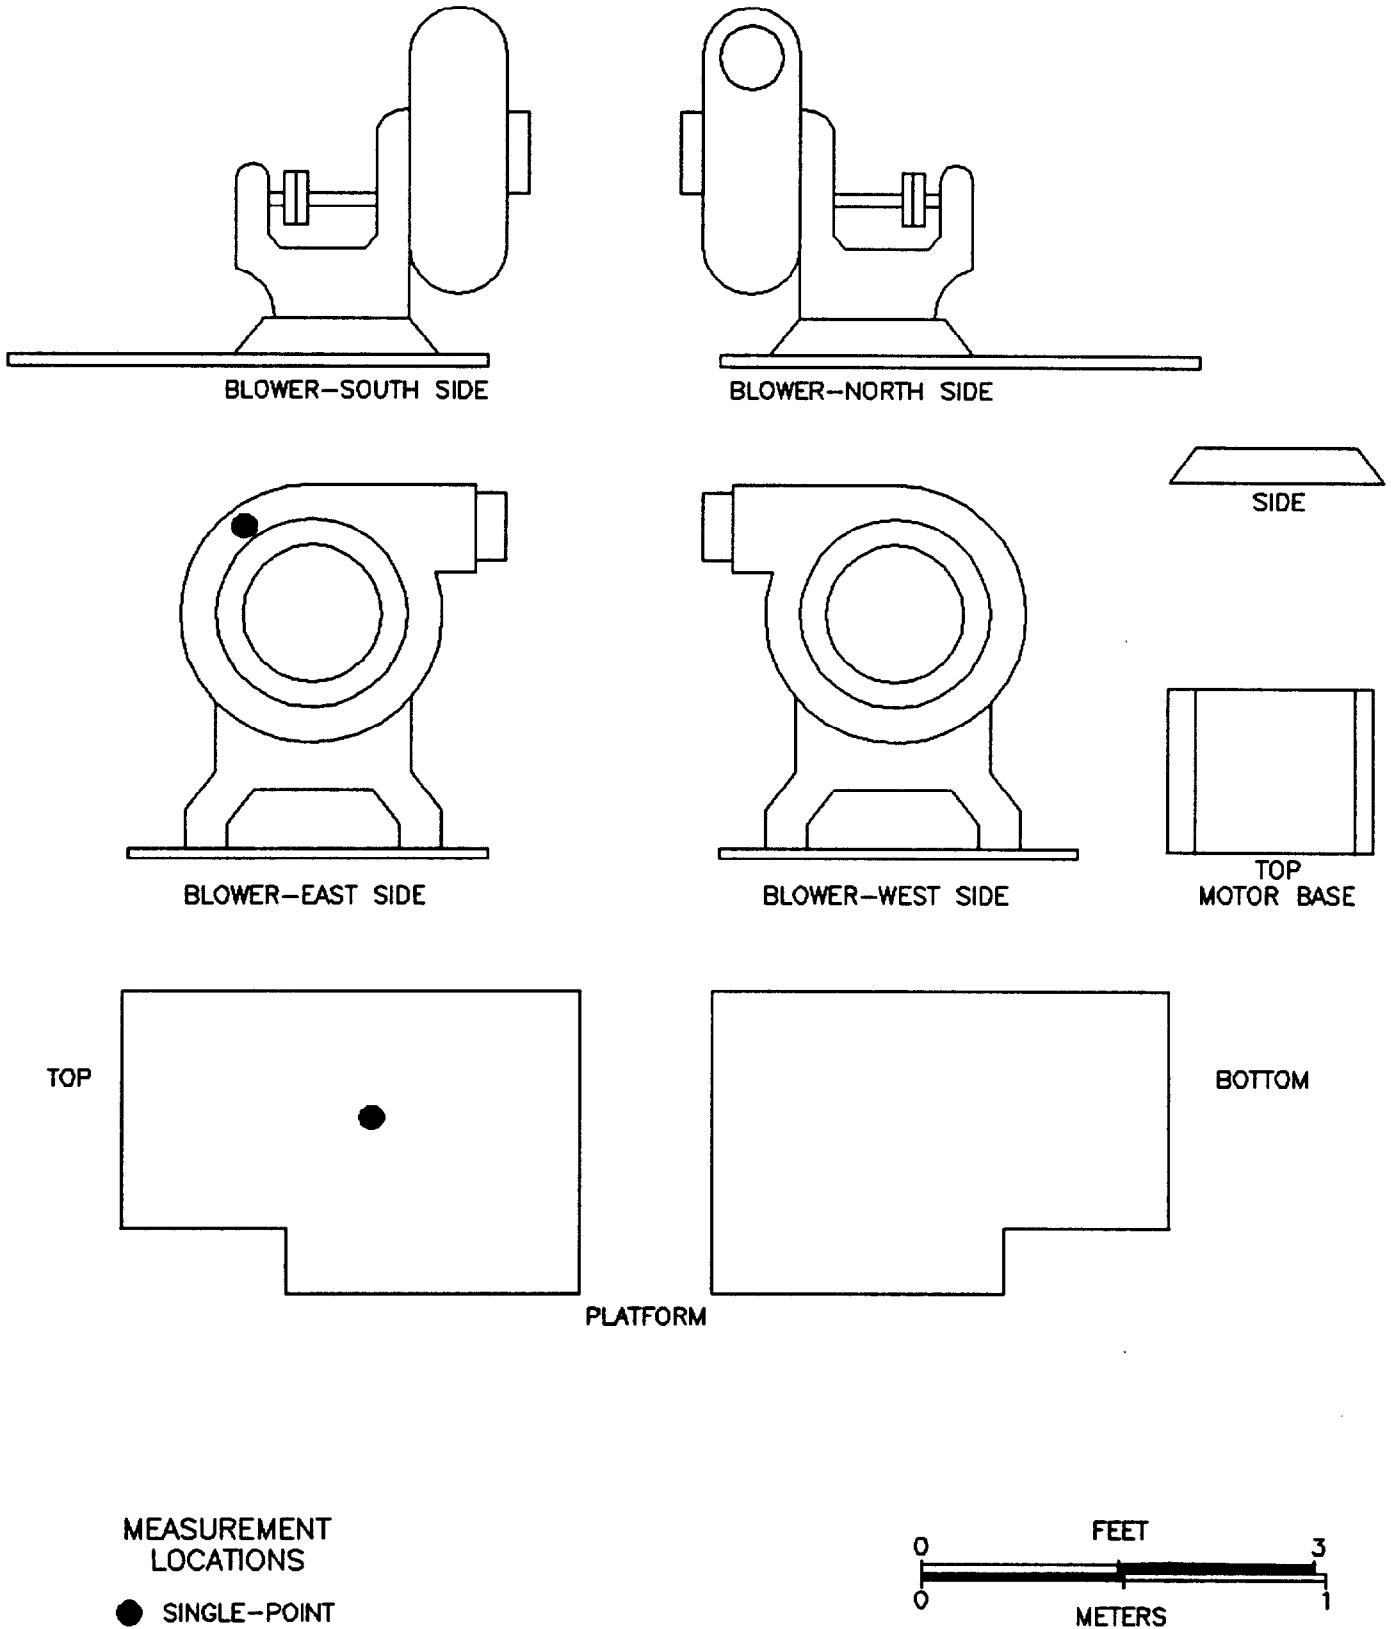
Building 23, Lab 1, North Wall Blower – Measurement Locations
